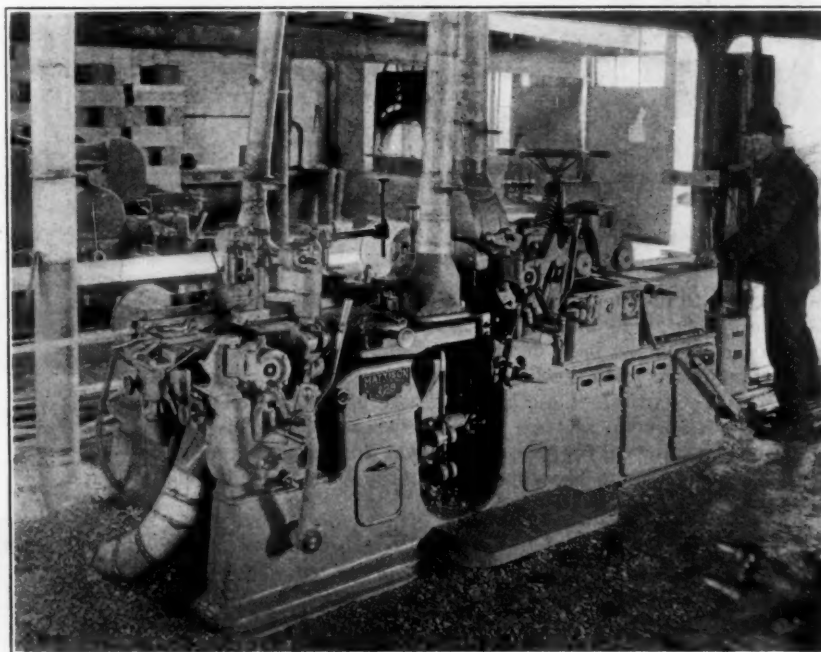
BALL-BEARING ELECTRIC MOLDER OF LATEST TYPE IN OPERATION
